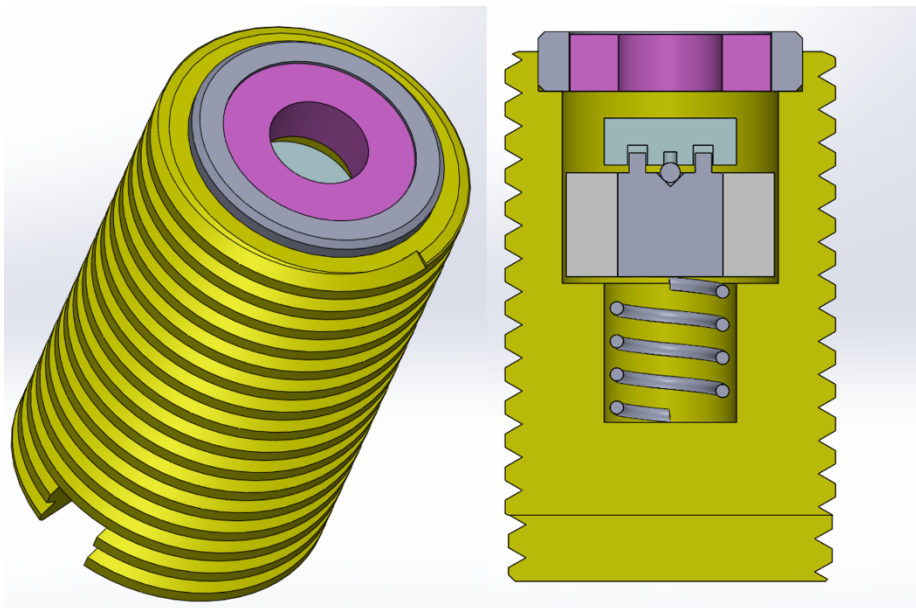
Cross-section View of the Assembled Bearing Housing
